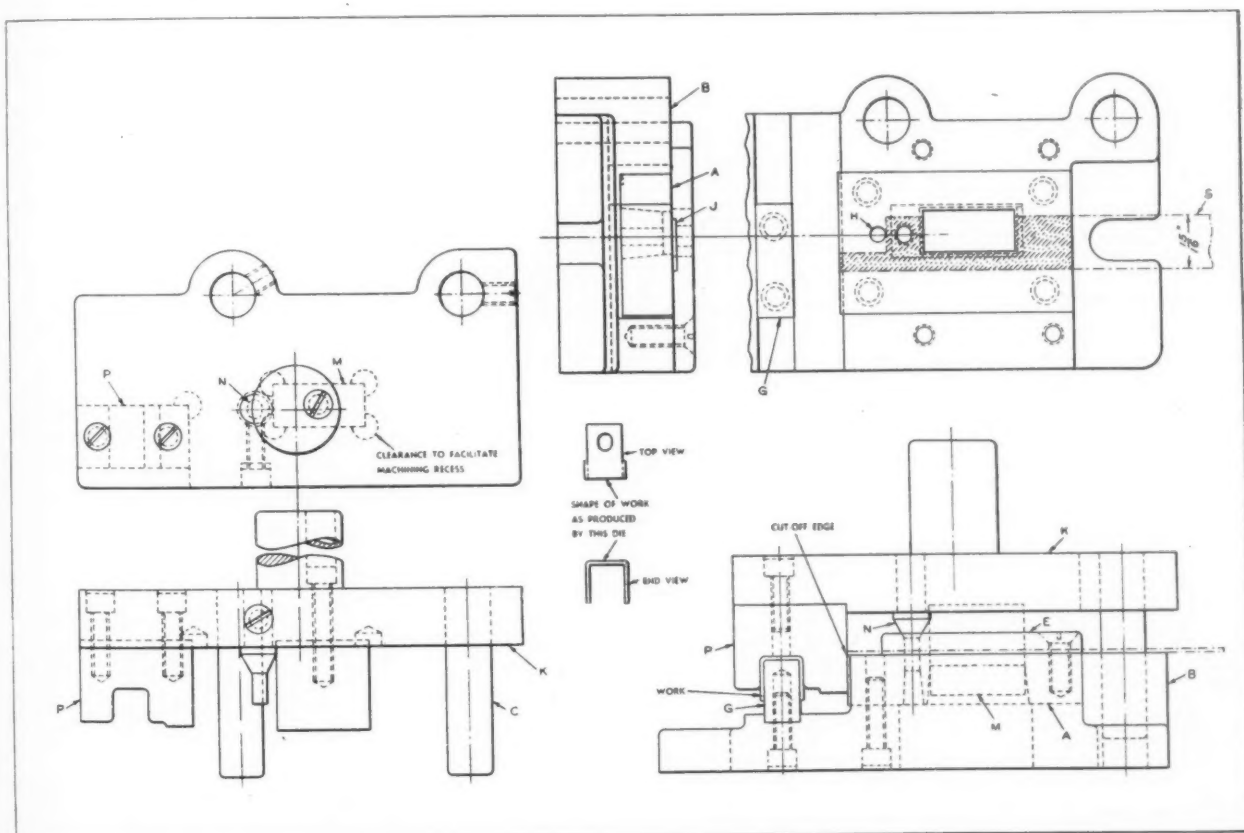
Blanking, Piercing, and Forming Die for First Operation on Printing Press Gripper Pad
